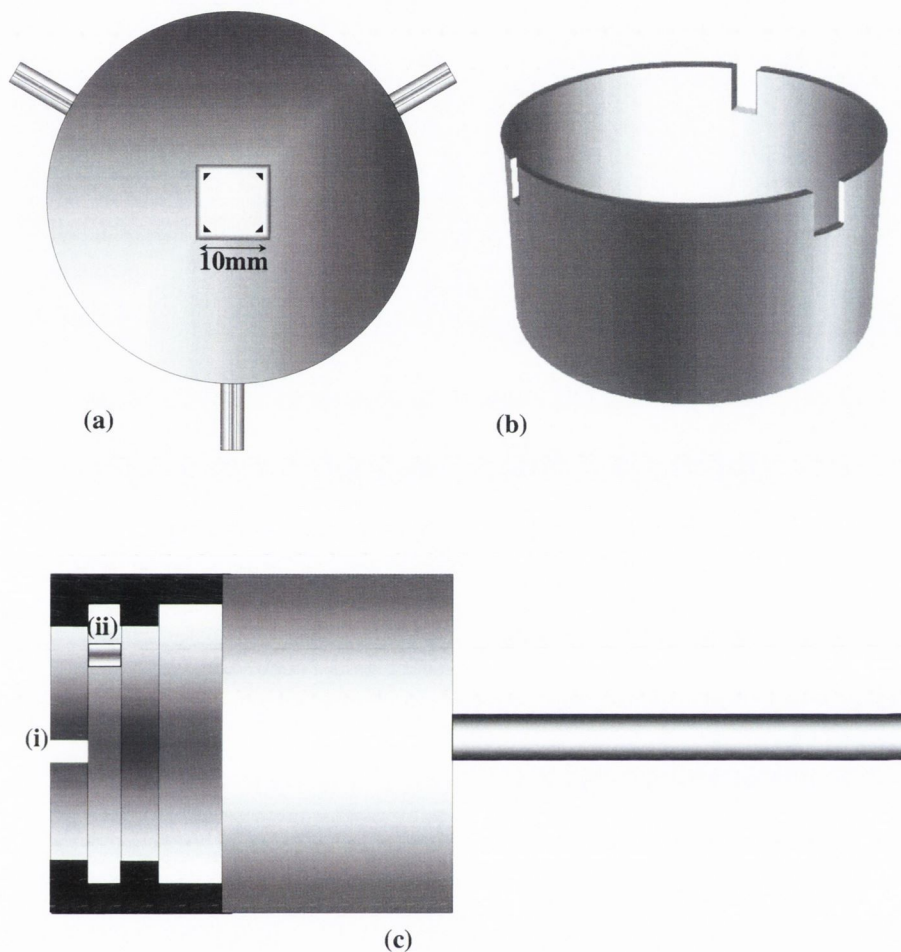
(a) Molybdenum sample holder (b) Cup (c) transfer tool (i) rectangular slot (ii) stopping screw
